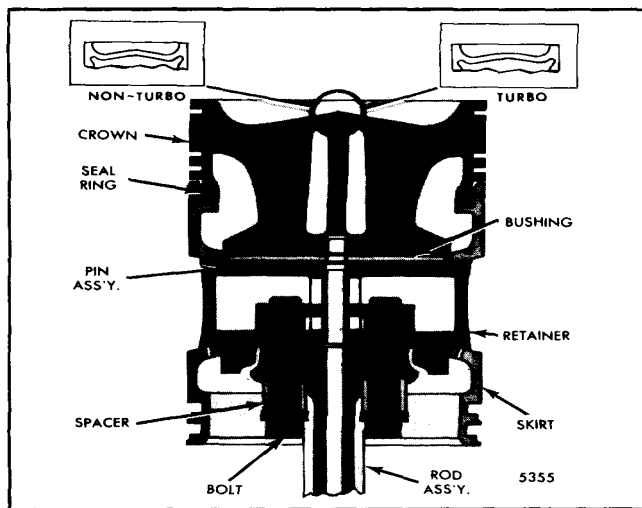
cross-Head Piston and Connecting Rod Assembly
